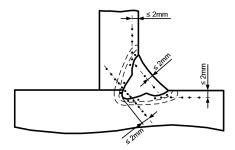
Example of arrangement of hardness test points for incomplete penetration fillet weld
